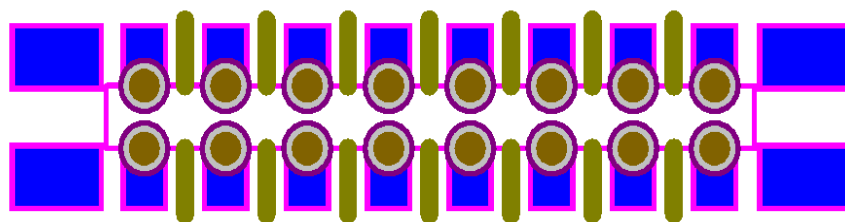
Plug-in PCB Land Pattern (Unit: mm)
